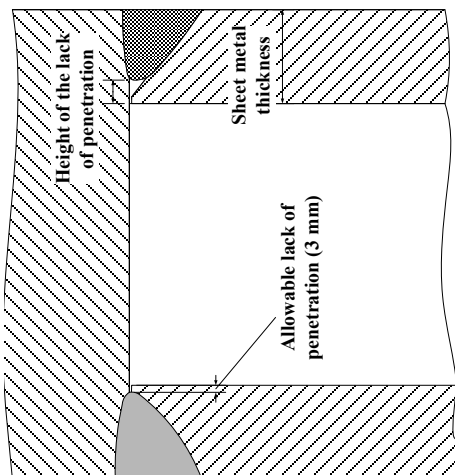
Welded joints with the lack of root penetration at the side of the upper sleeve
